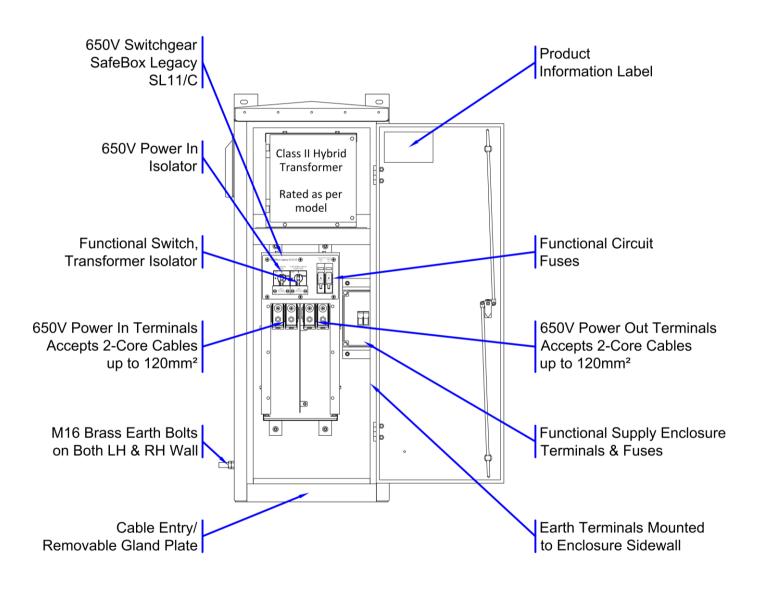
Legacy Connect (SL11/C) Internal Arrangement
